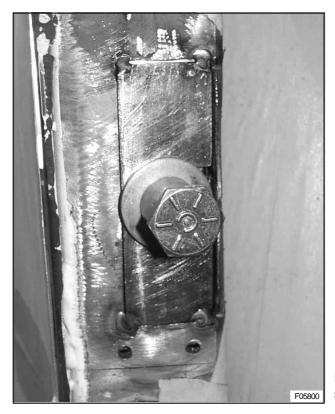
striker bolt base plate assembly spotwelded in place
